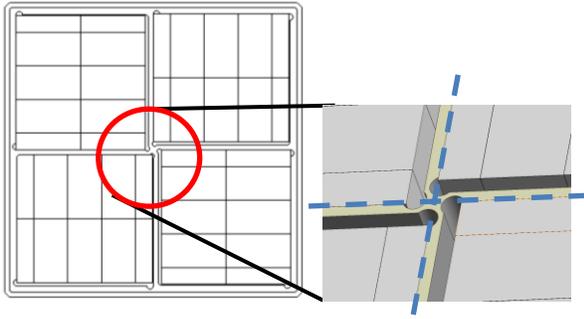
View of the bottom side of the stage (the 2-D optical grid is removed)
